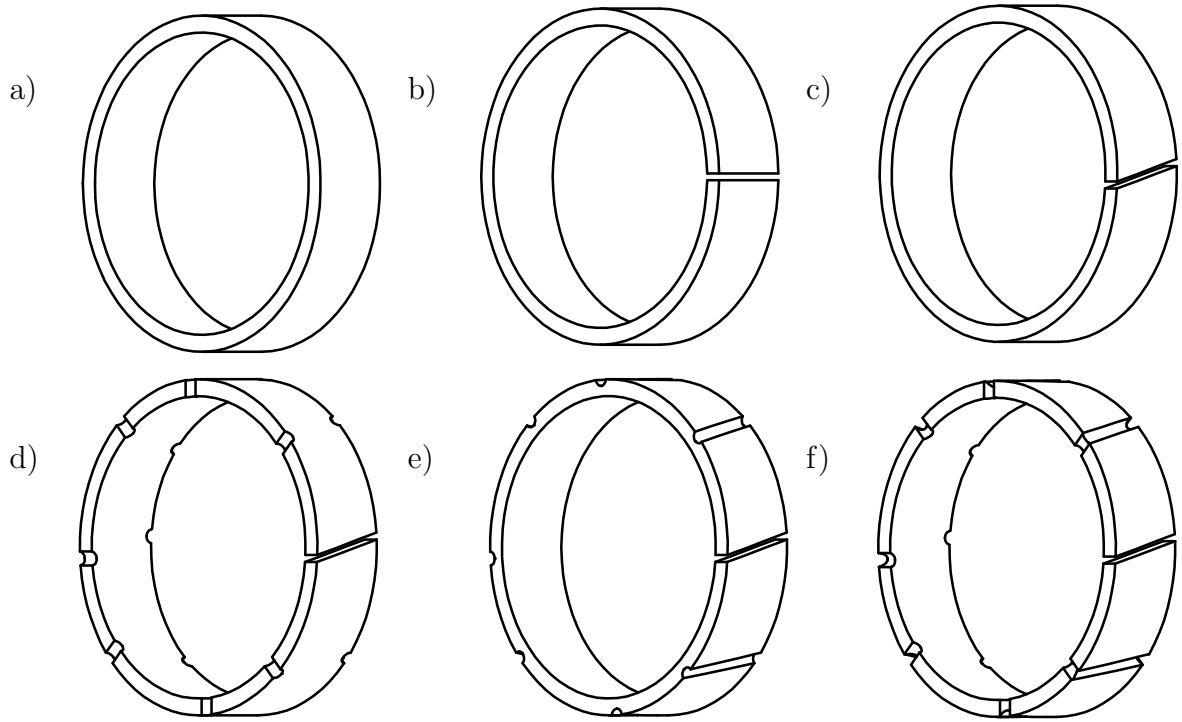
Rider ring designs for single piece rings: a) uncut ring, b) radially straight-cut ring, c) angle-cut ring, d) angular-cut ring with radial pressure-relieve grooves, e) angular-cut ring with axial pressure relieve grooves, f) angular-cut ring with radial and axial pressure relieve grooves. Similar versions of d) to f) can be found with the cut and the pressure relieve grooves in straight axial direction. Two-piece rings have another cut shifted by 180° .
